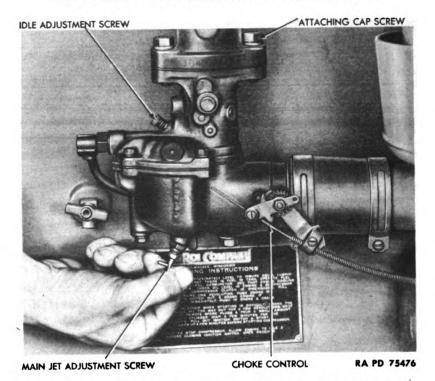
Adjusting Compressor Unit Engine Carburetor
